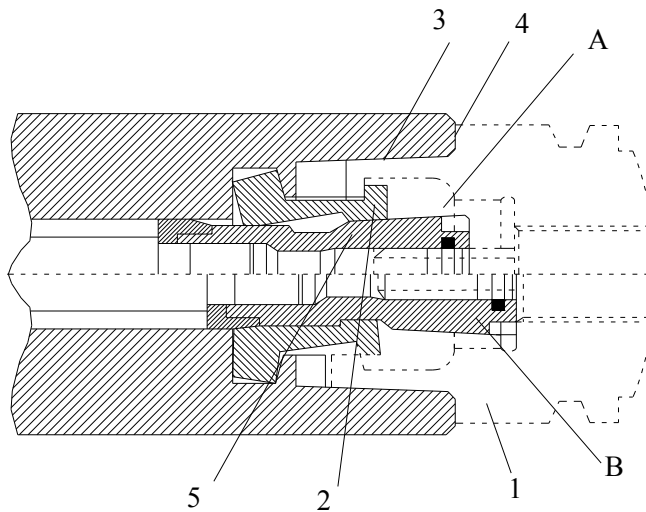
Tool fixing using the HSK holder: A – position of elements in the state of fixing the tool, B – position of elements by connection loosening, 1 – HSK shank, 2 – elastic sleeve, 3 – taper, 4 – connection flange of tool adapter, 5 – elastic pin
